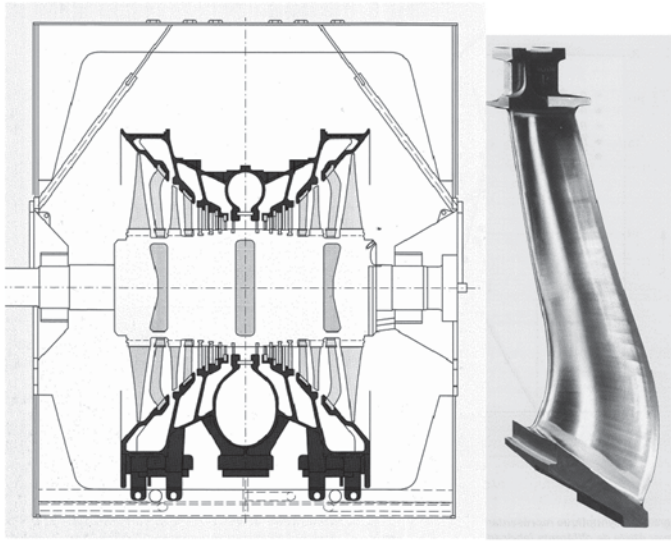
3D-shape of the stator vane of the final stage in the LP part of a steam turbine. (Courtesy Alstom)
